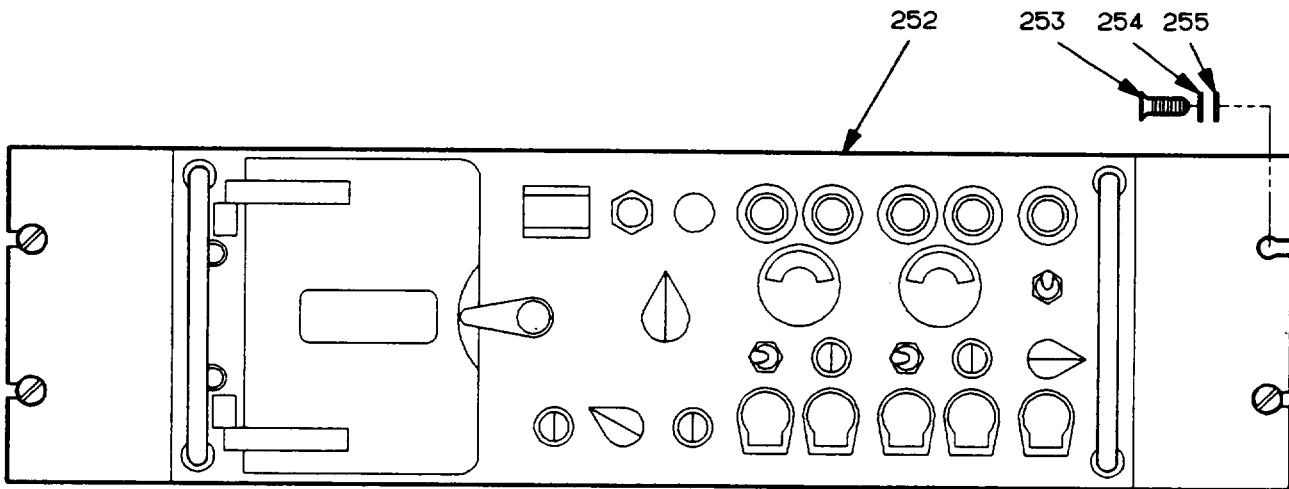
SHELTER ASSEMBLY (SHEET 20 OF 24)
